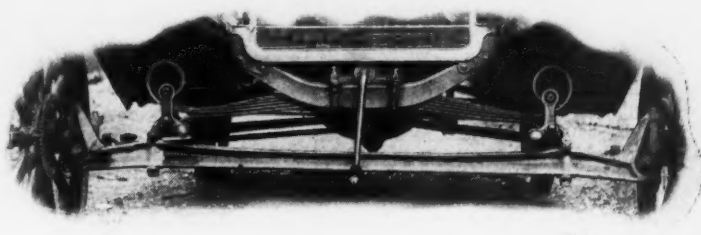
FORD EQUIPPED WITH RESILIO SPRING IN FRONT
